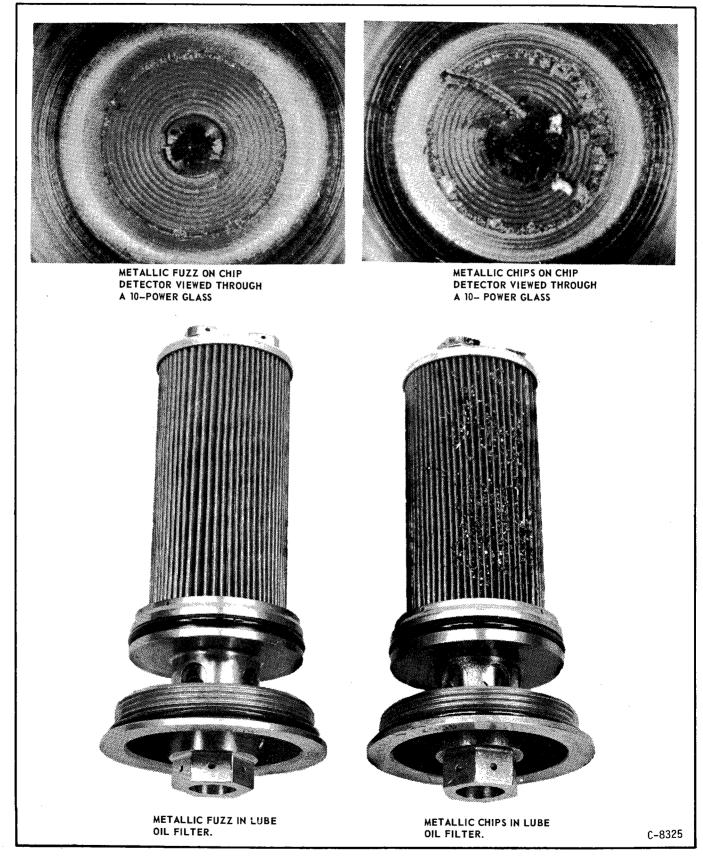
Magnetic Chip Detector and Oil Filter Inspection
